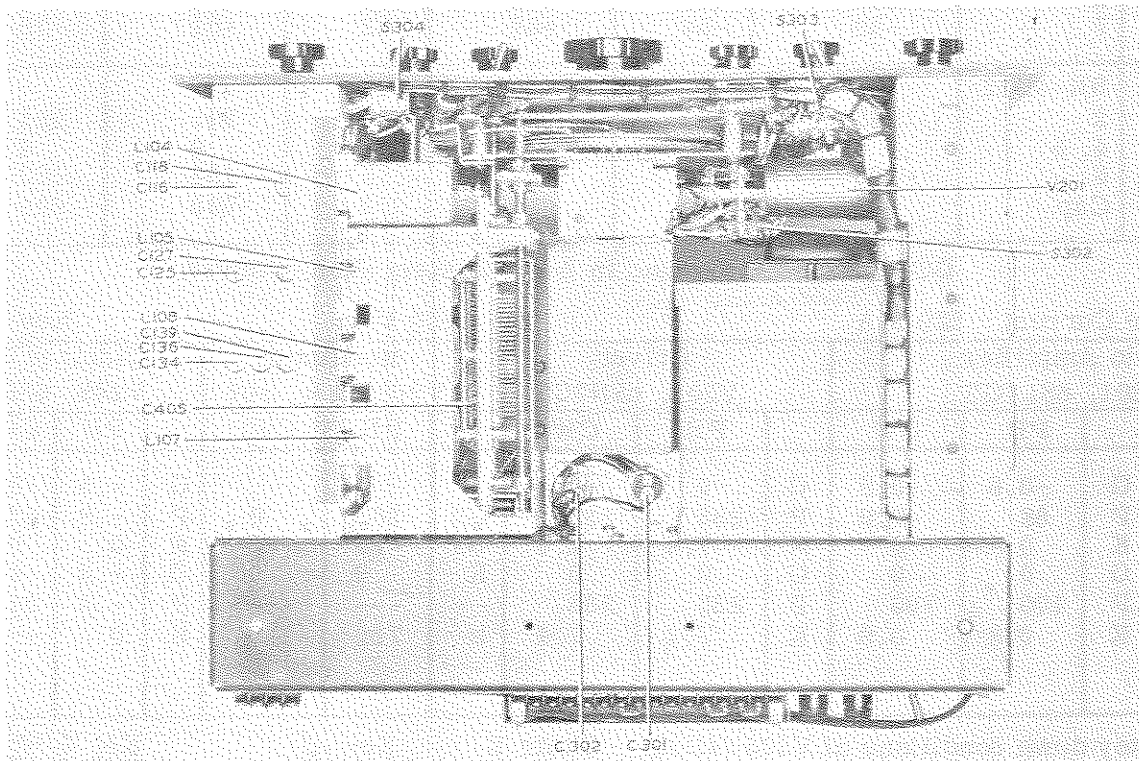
32V-2 Parts Arrangement - Bottom View
